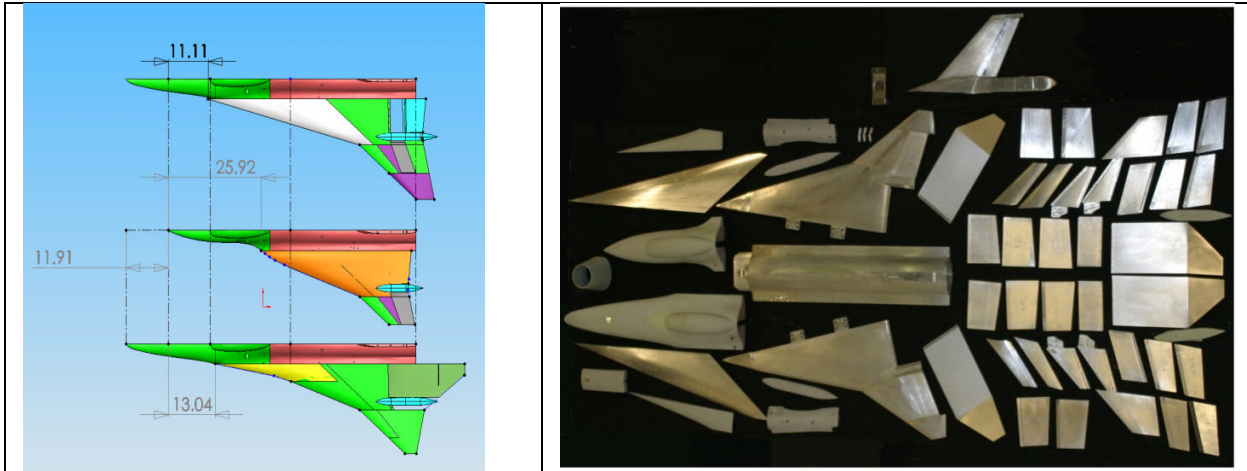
Wind tunnel configurations and models tested at the Kirsten Wind Tunnel for the 2007 capstone airplane design course. Wind tunnel model developed built by Aeronautical Testing Service, Inc., of Arlington, WA.
